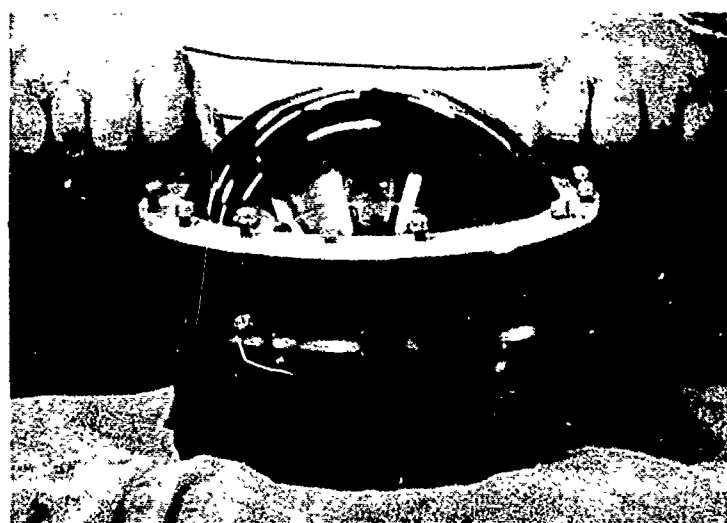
The bolt holes are lined up and screws are inserted through the window retainer into the mounting ring.
